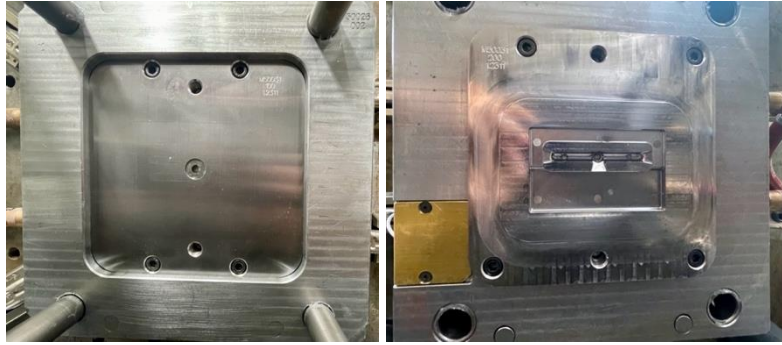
Mould core and cavity used for the injection tests: cavity (left); core (right).
